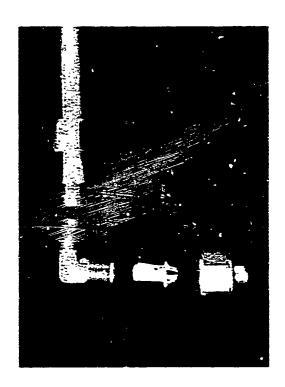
EXPLODED VIEW OF LOWER END OF FILTER
